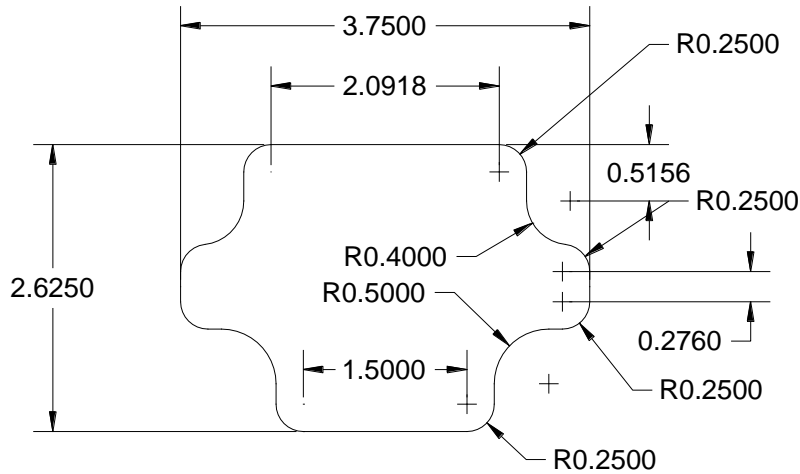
Dimensions of special bearing plate (unit: in.).
